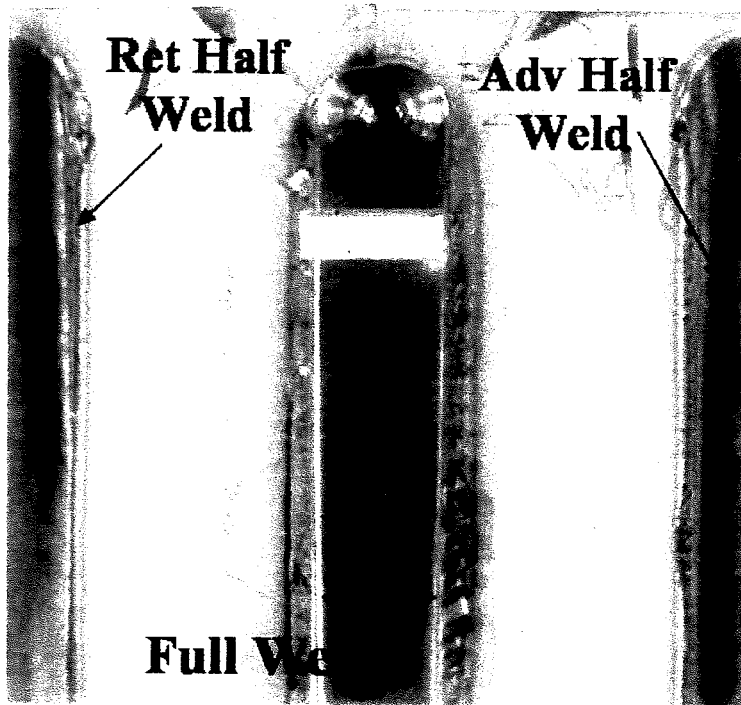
1 As-received AL-6XN plate containing a full FS weld, an advancing side half weld, and a retreating side half weld.
